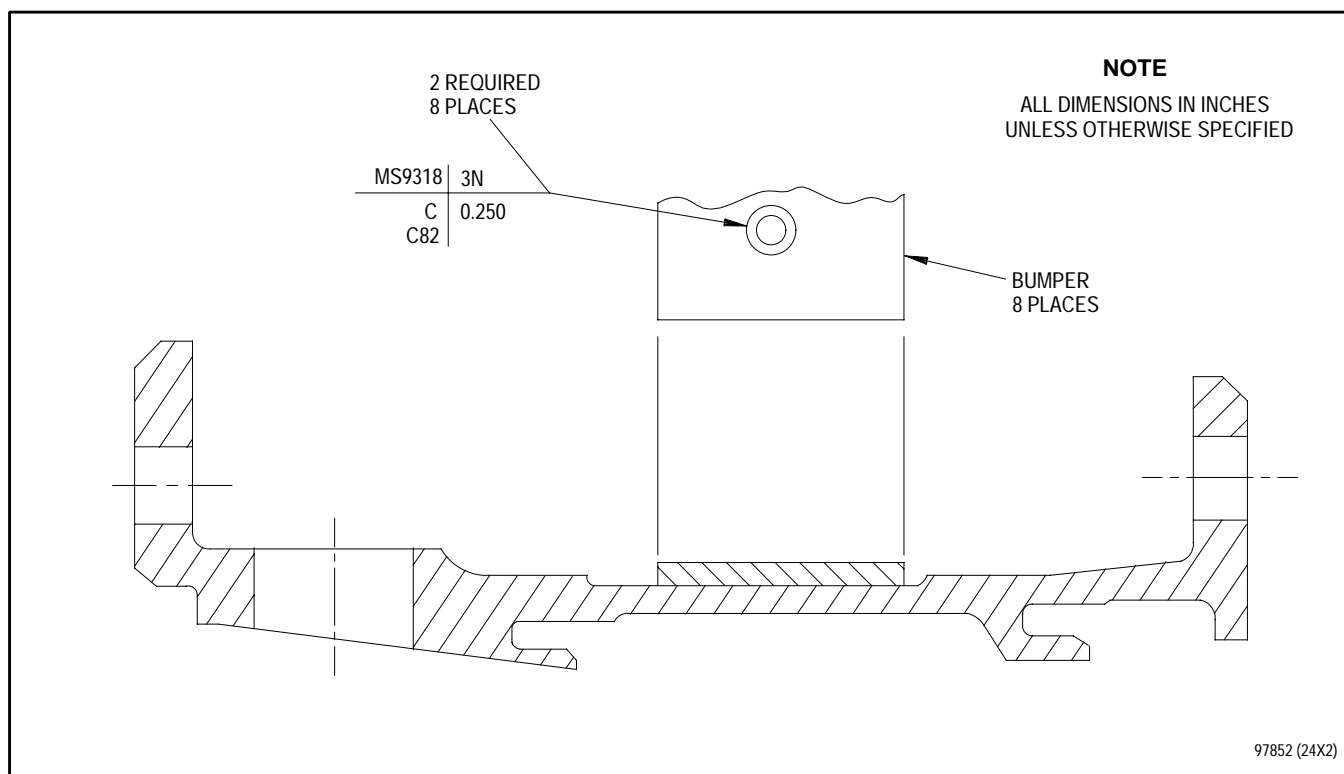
Fourth Through Ninth Stage Compressor Case Assembly - Bumper Replacement
